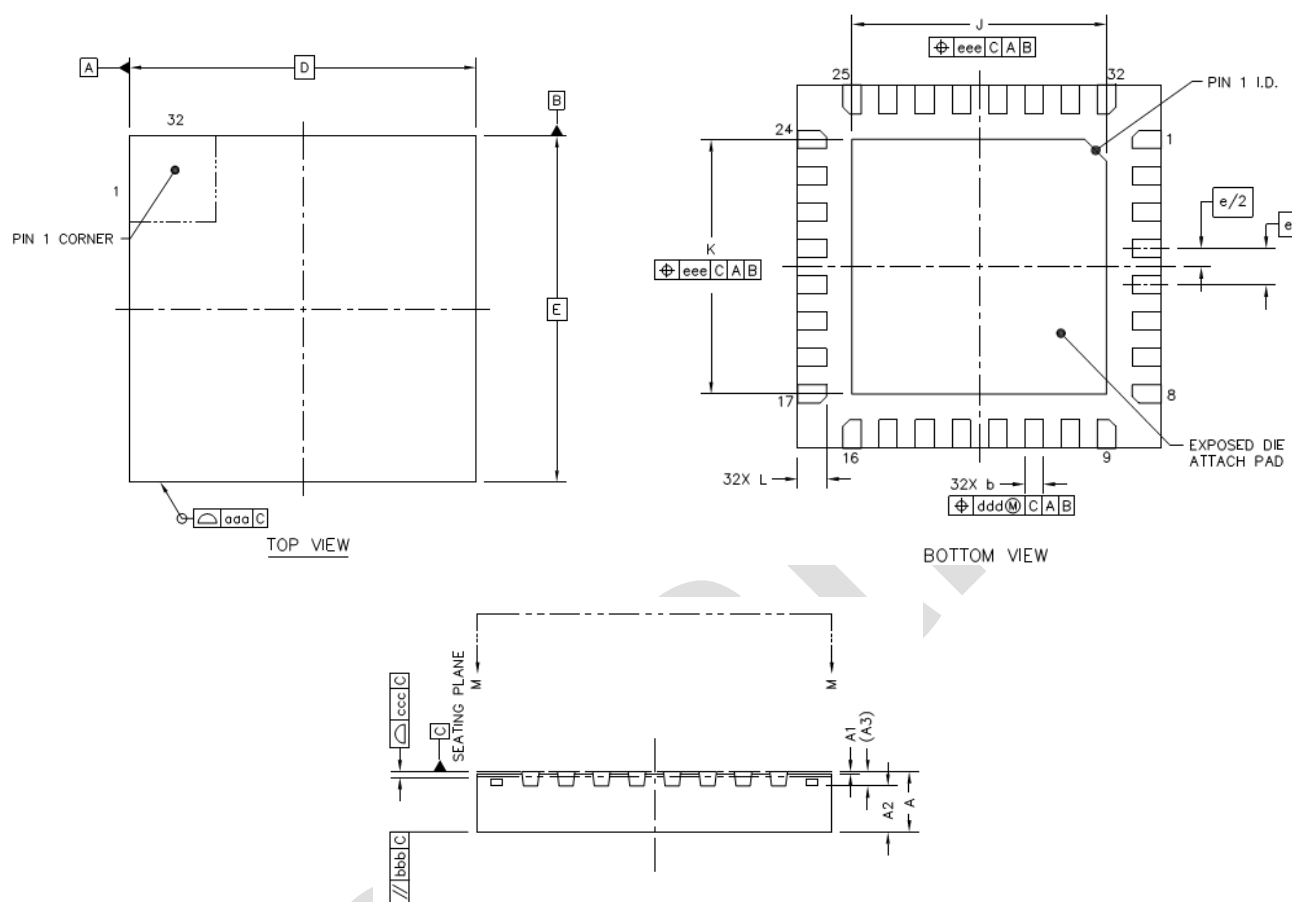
Top, Bottom and Side View of NR2049 QFN Package
